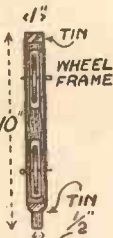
Details of the wheels and method of mounting them. WHEEL 2 1/2" DIA.
